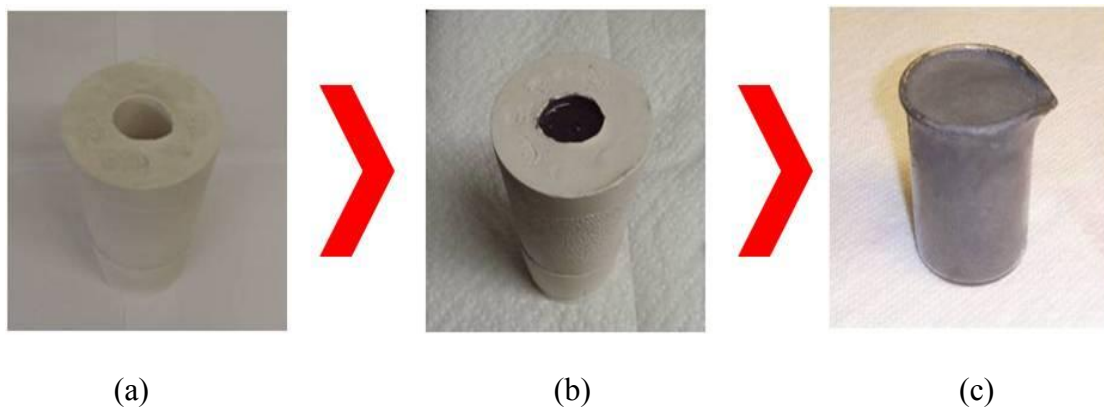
Process of the slip casting (a) mold (b) mold with suspension (c) beaker for HIPing.
